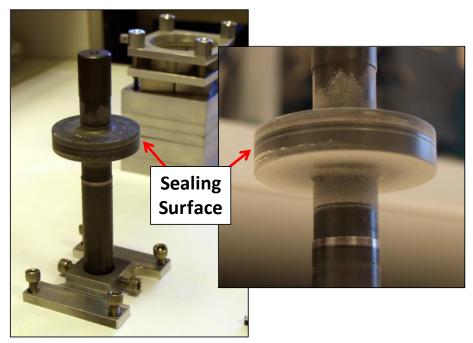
Aeroflex test shaft showing wear indications on sealing surface.
